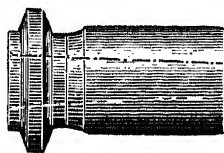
shows a flange mandrel that can be bolted to the face plate of a lathe; it has stepped dies, so as to take two diameters of work. The dies are
